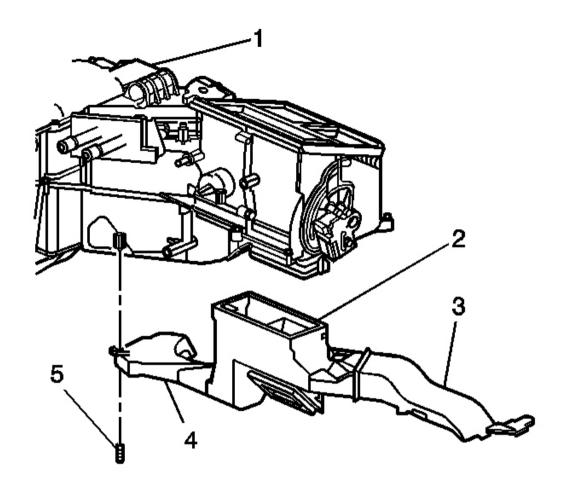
Floor Air Outlet Duct (LH) Courtesy of GENERAL MOTORS CORP.
